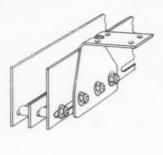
Standard attachments for chuting include safety guard rails, chip-and-drip troughs, and brackets for mounting counters, switches, and escapement mechanisms.
